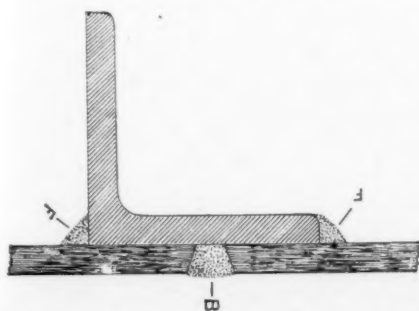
FLAT FILLET (F) AND OVERHEAD BUTT (B) WELDS
